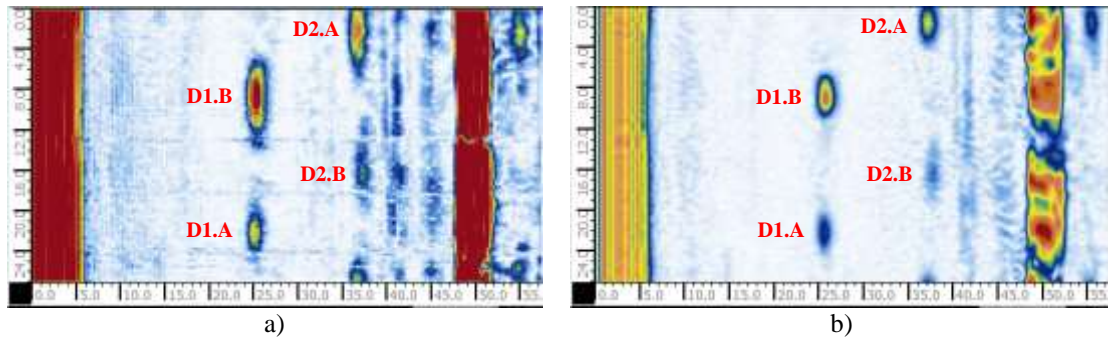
Pipe inspection exposed to air before machining the defects from test point S1 a) A-Scan, b) B-Scan
